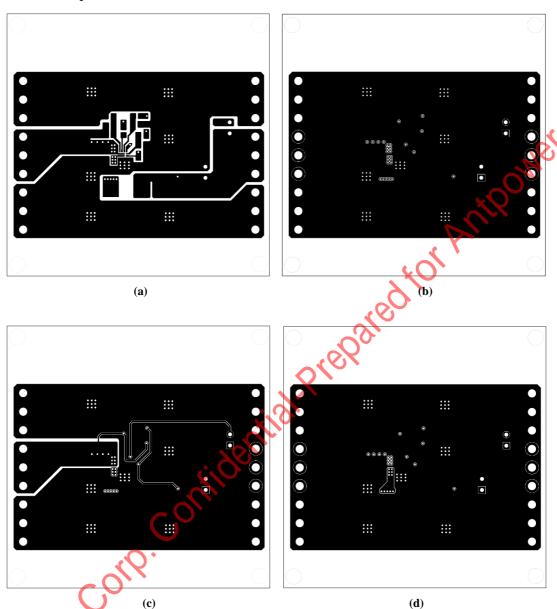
PCB Layout Plots: (a) top layer, (b) middle layer 1, (c) middle layer 2, (d) bottom layer
